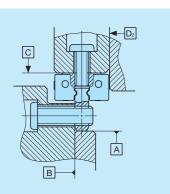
Reference mounting surface and general mounting structure ① of LWL1··· Y
